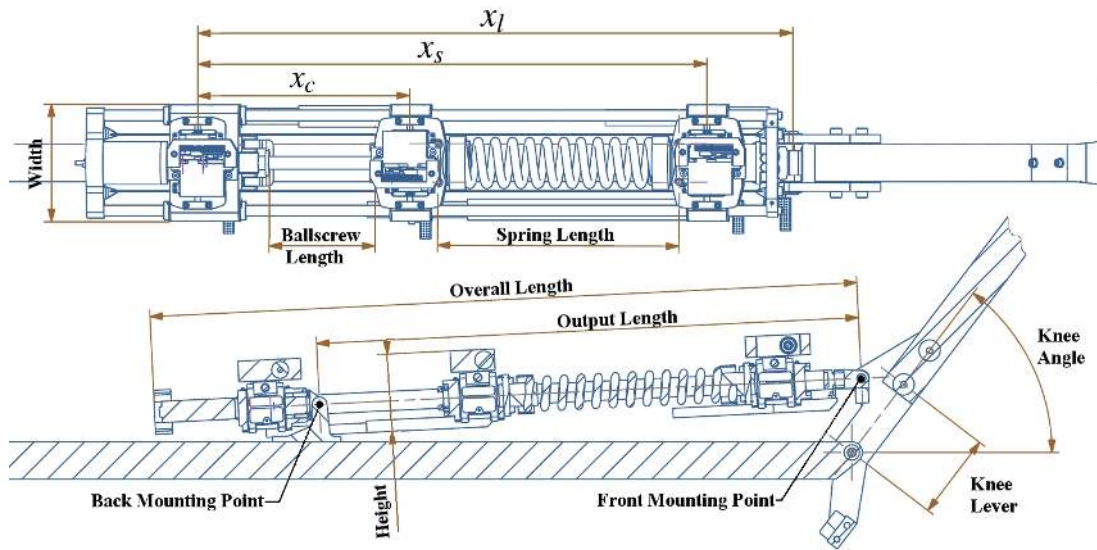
Top and side view of the LMMA mounted in the rotary joint of a two segment leg. The specifications of the actuator are listed in Tab. 2.2.
